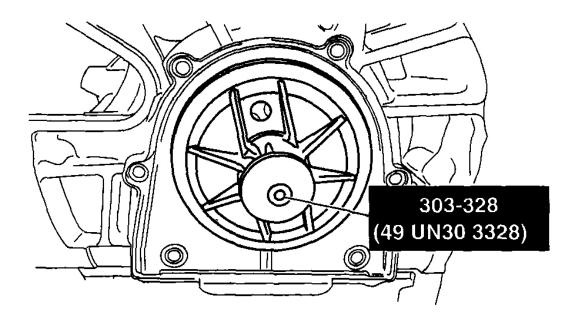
Installing Rear Oil Seal Using SST Courtesy of MAZDA MOTORS CORP.
